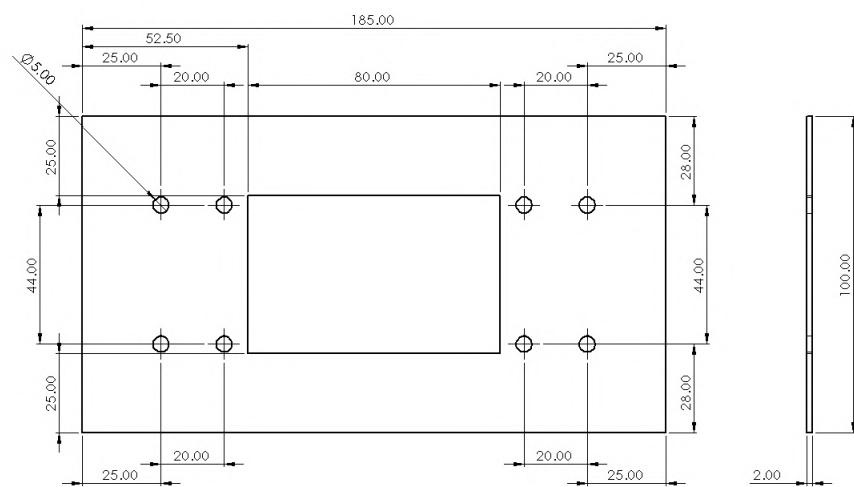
2D Drawing of the side plate (All dimensions are in mm)
